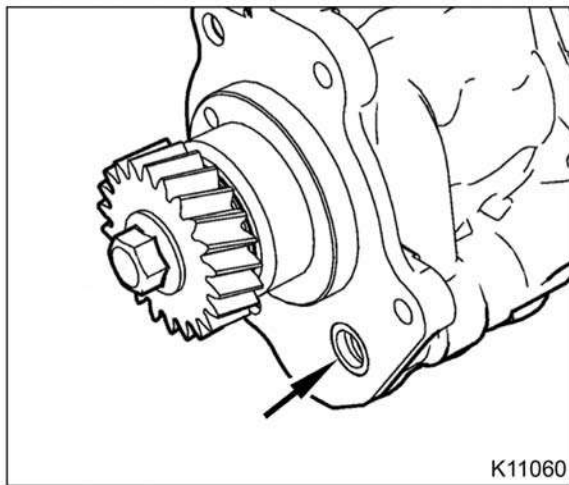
Stepped inlet throttle spring retainer in high-pressure pump
